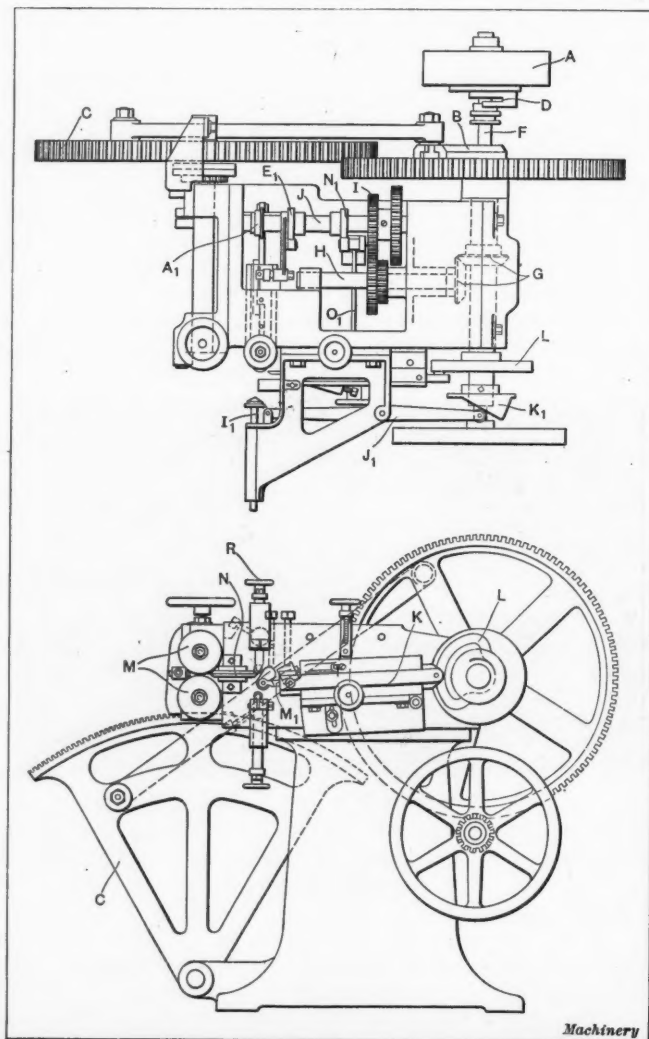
Plan and Elevation Views of the Spring Coiling Machine shown in Fig. 7
